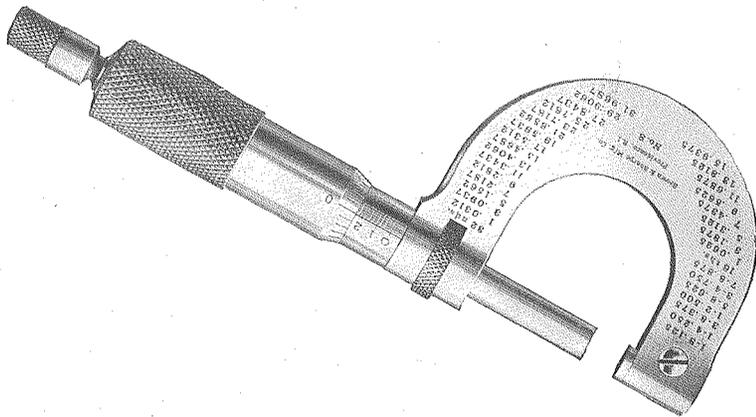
A Micrometer Gauge Reading to the 1-1000 of an Inch
